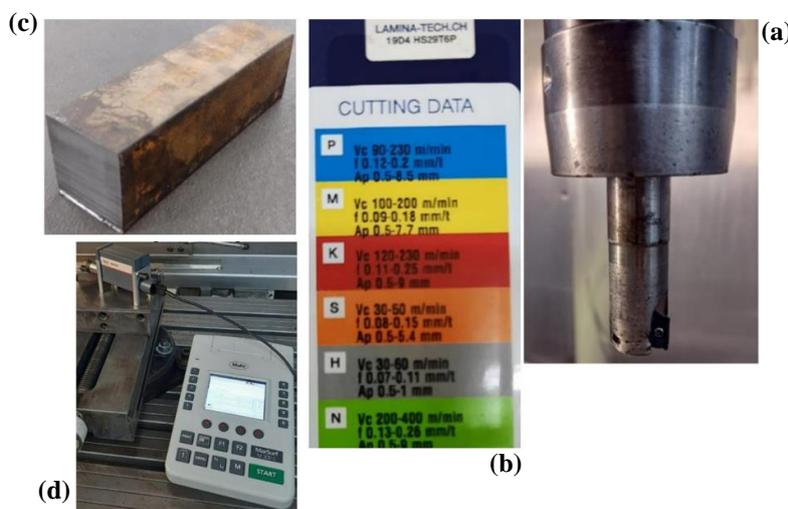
(a) Milling cutter, (b) cutting inserts, (c) D6 tool steel test specimen and (d) MAHR digital roughness meter.
